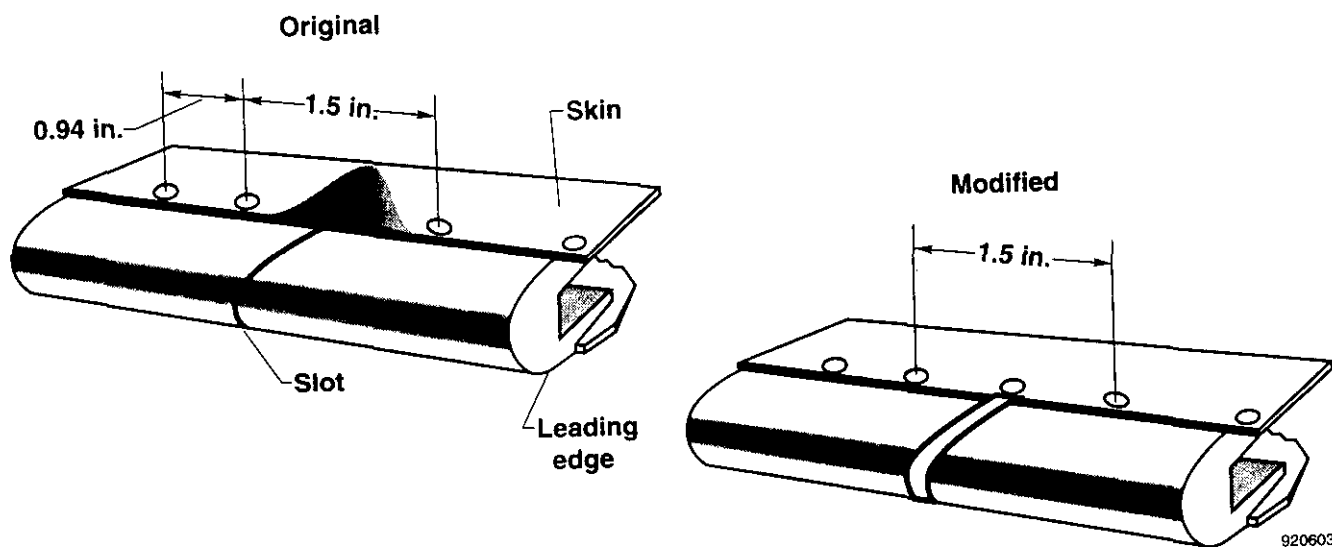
Wing skin buckle following flight to Mach 5.28.
